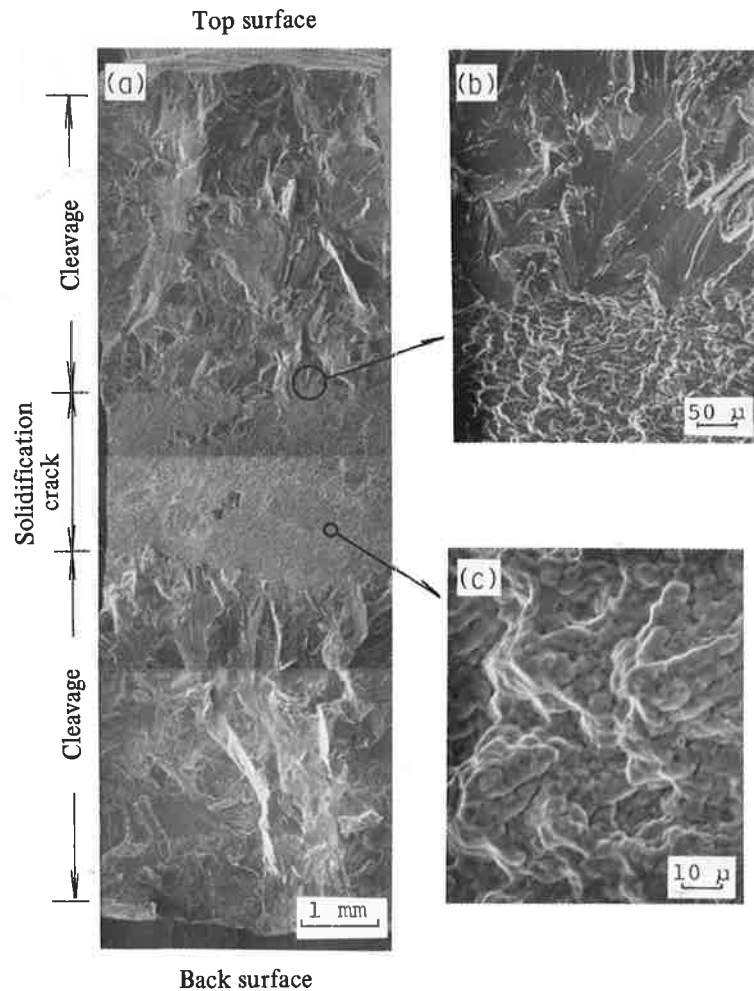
(a) Fracture surface of longitudinal crack and its close-up photos showing (b) cleavage fracture and (c) solidification cracking
